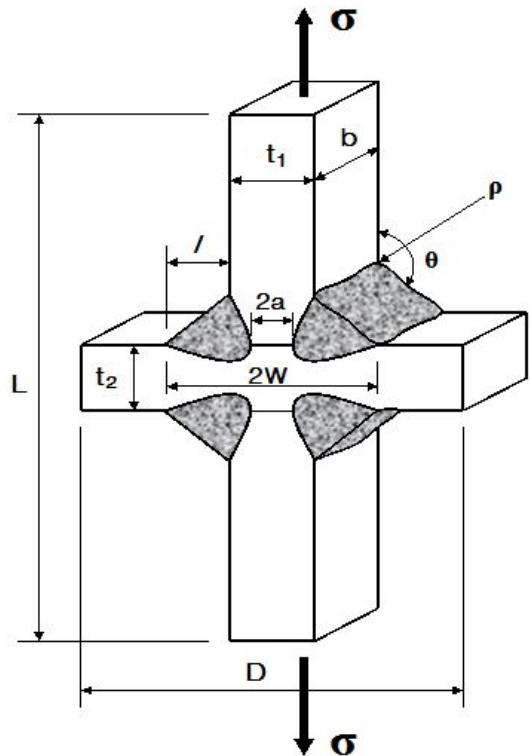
Configuration of cruciform fillet weld joint.
